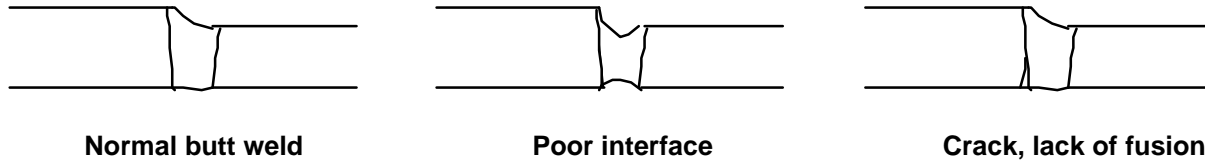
Schematic drawing of normal laser butt weld and poor weld with concave surfaces.
